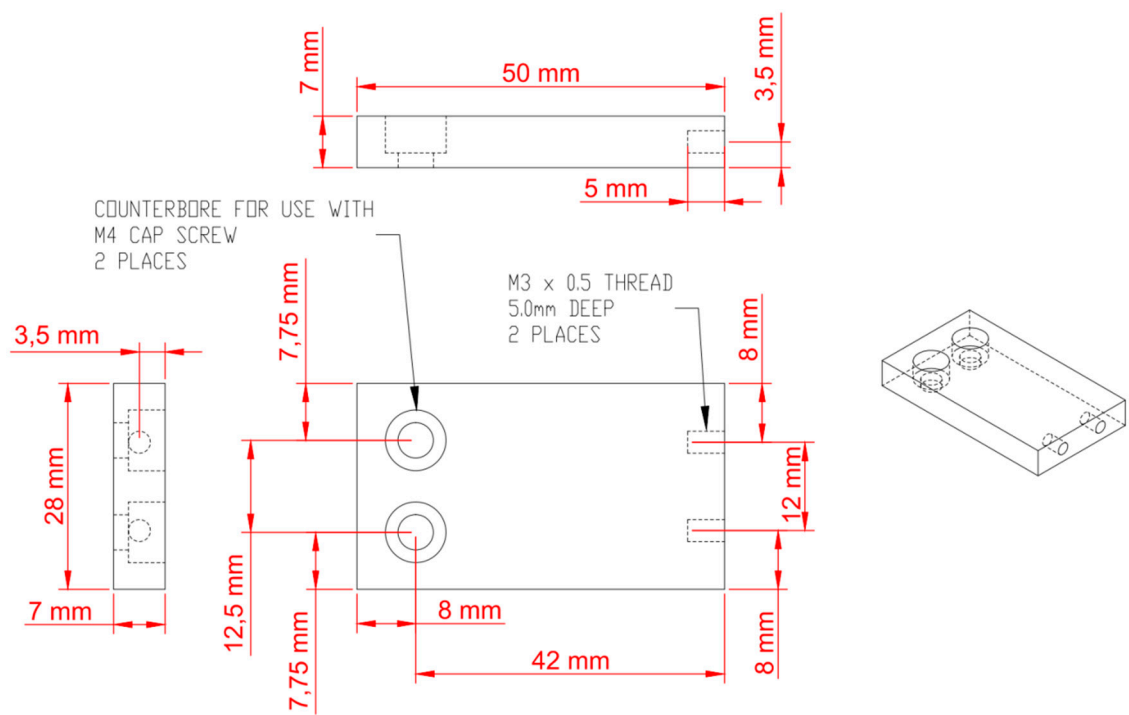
Detailed mechanical drawing of Part 5a from Figure S1.
